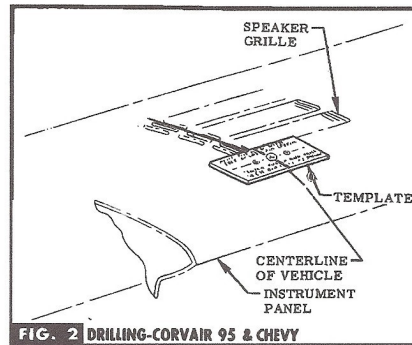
DRILLING-CORVAIR 95 & CHEVY
